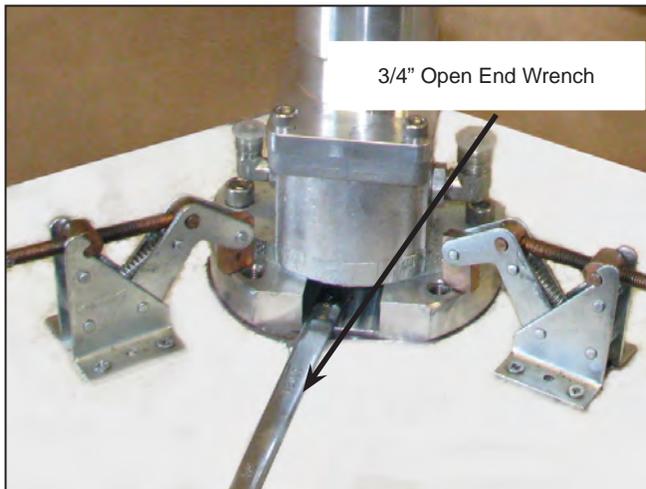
Thru-shaft motor on work bench showing position of slot and 3/4" open end wrench.
